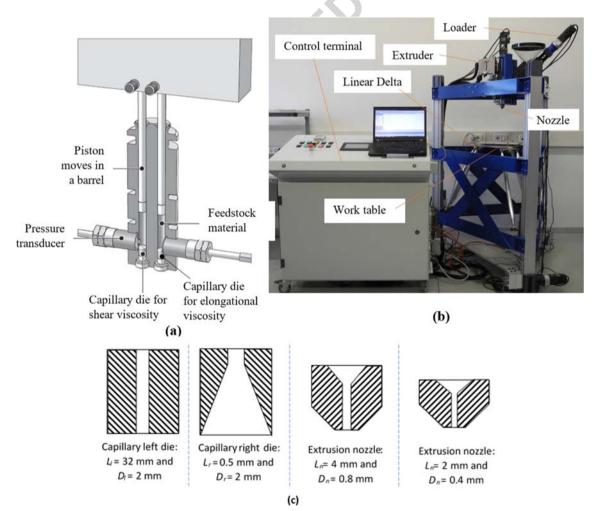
Main components of a capillary rheometer and b EFeSTO machine and c schematic of die and nozzles
